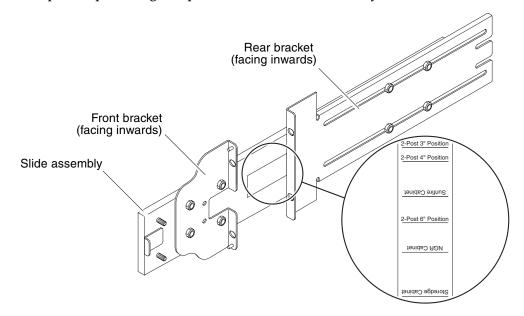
Rail Assembly (Modified for Two-Post Installation)
